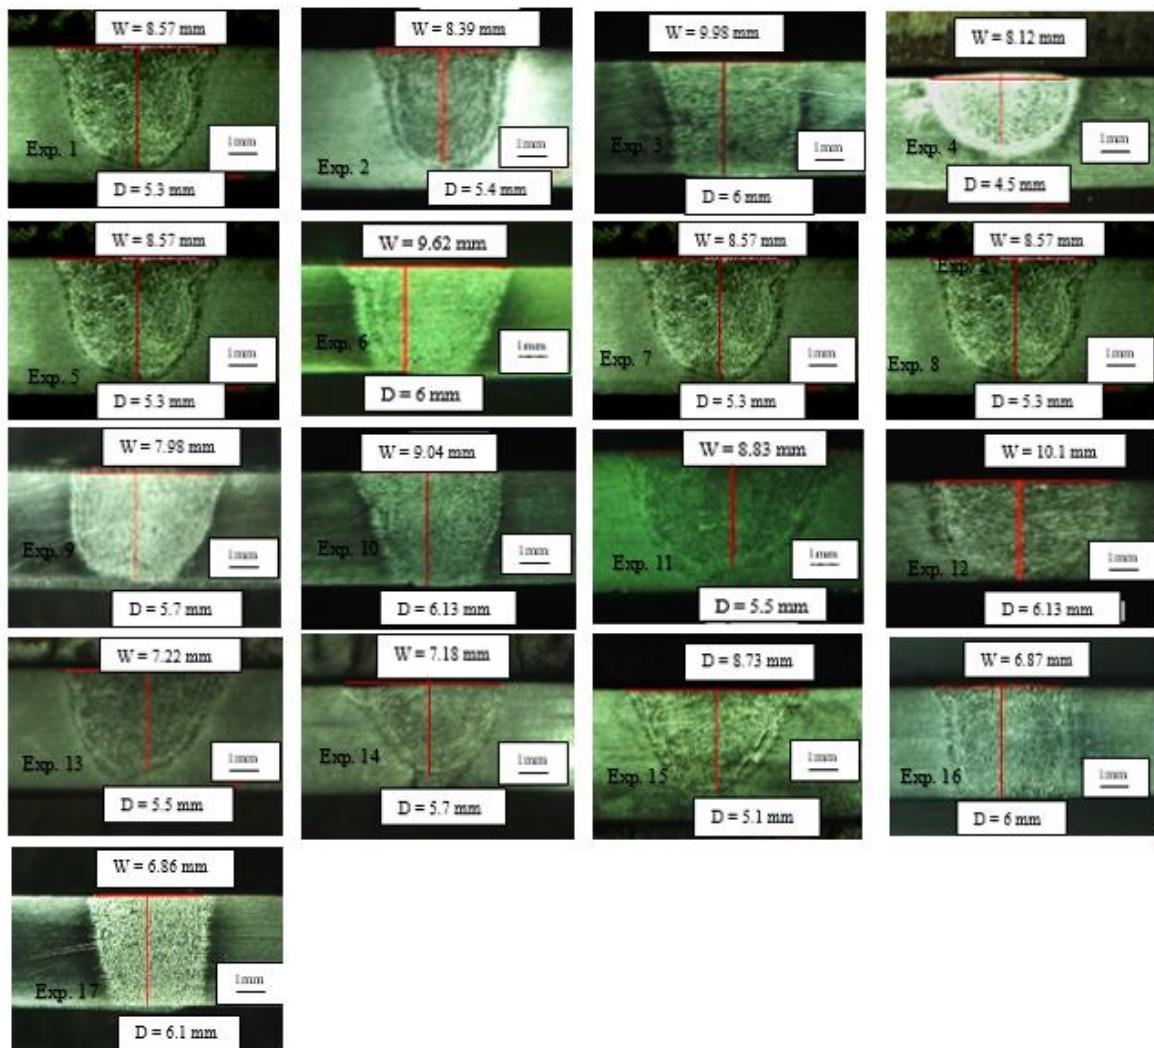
Macrostructure of A-TIG 2205 DSS weld metal
